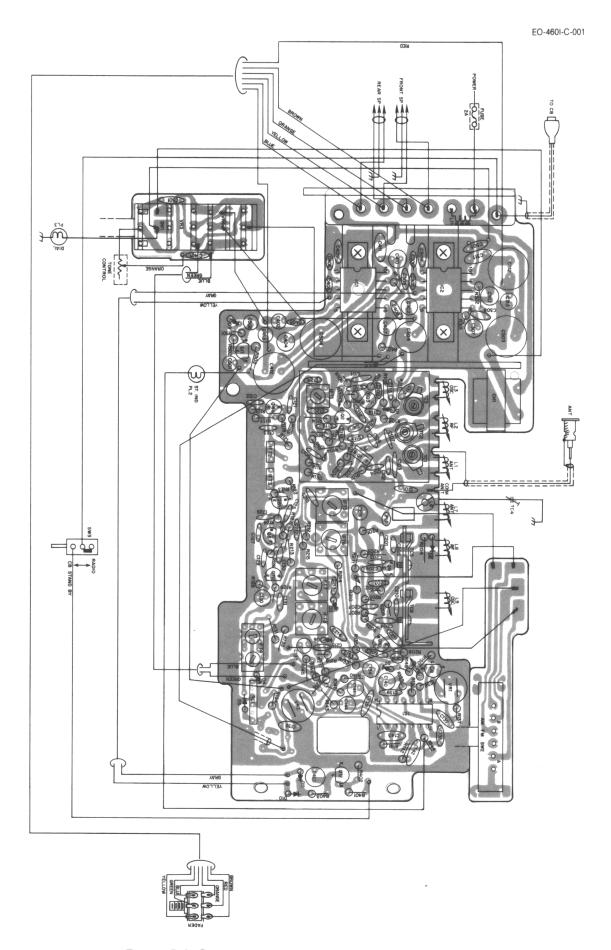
Component Outline, P.C. Boards, Model 4601
